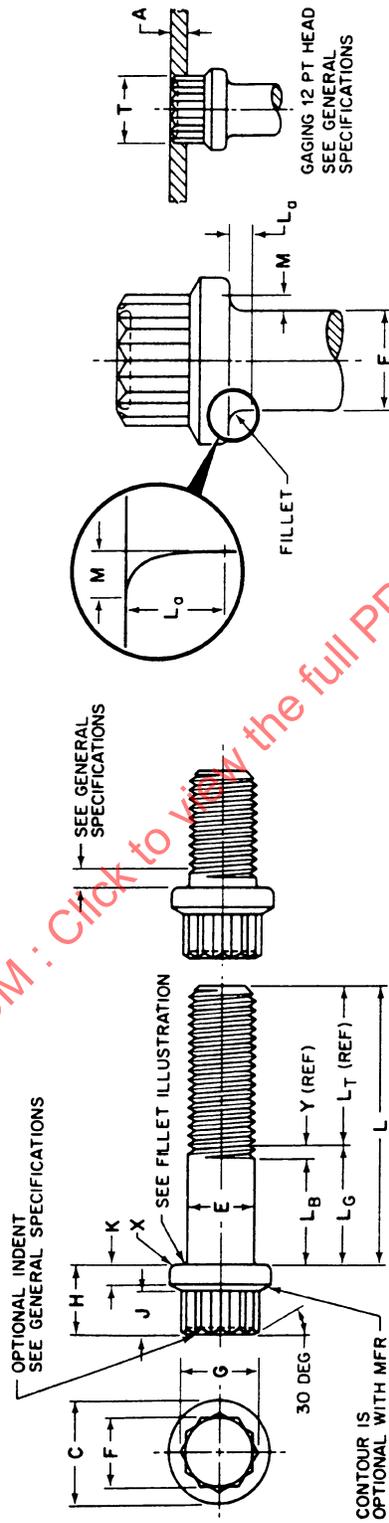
DIMENSIONS OF FLANGED 12-POINT SCREWS AND HEAD GAGING RINGS
